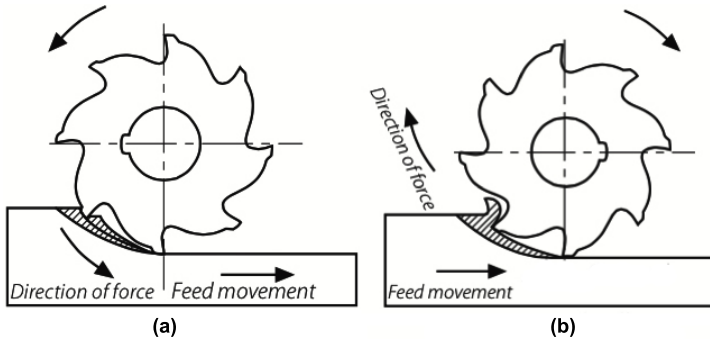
Milling direction: (a) down-milling and (b) up-milling [30].
